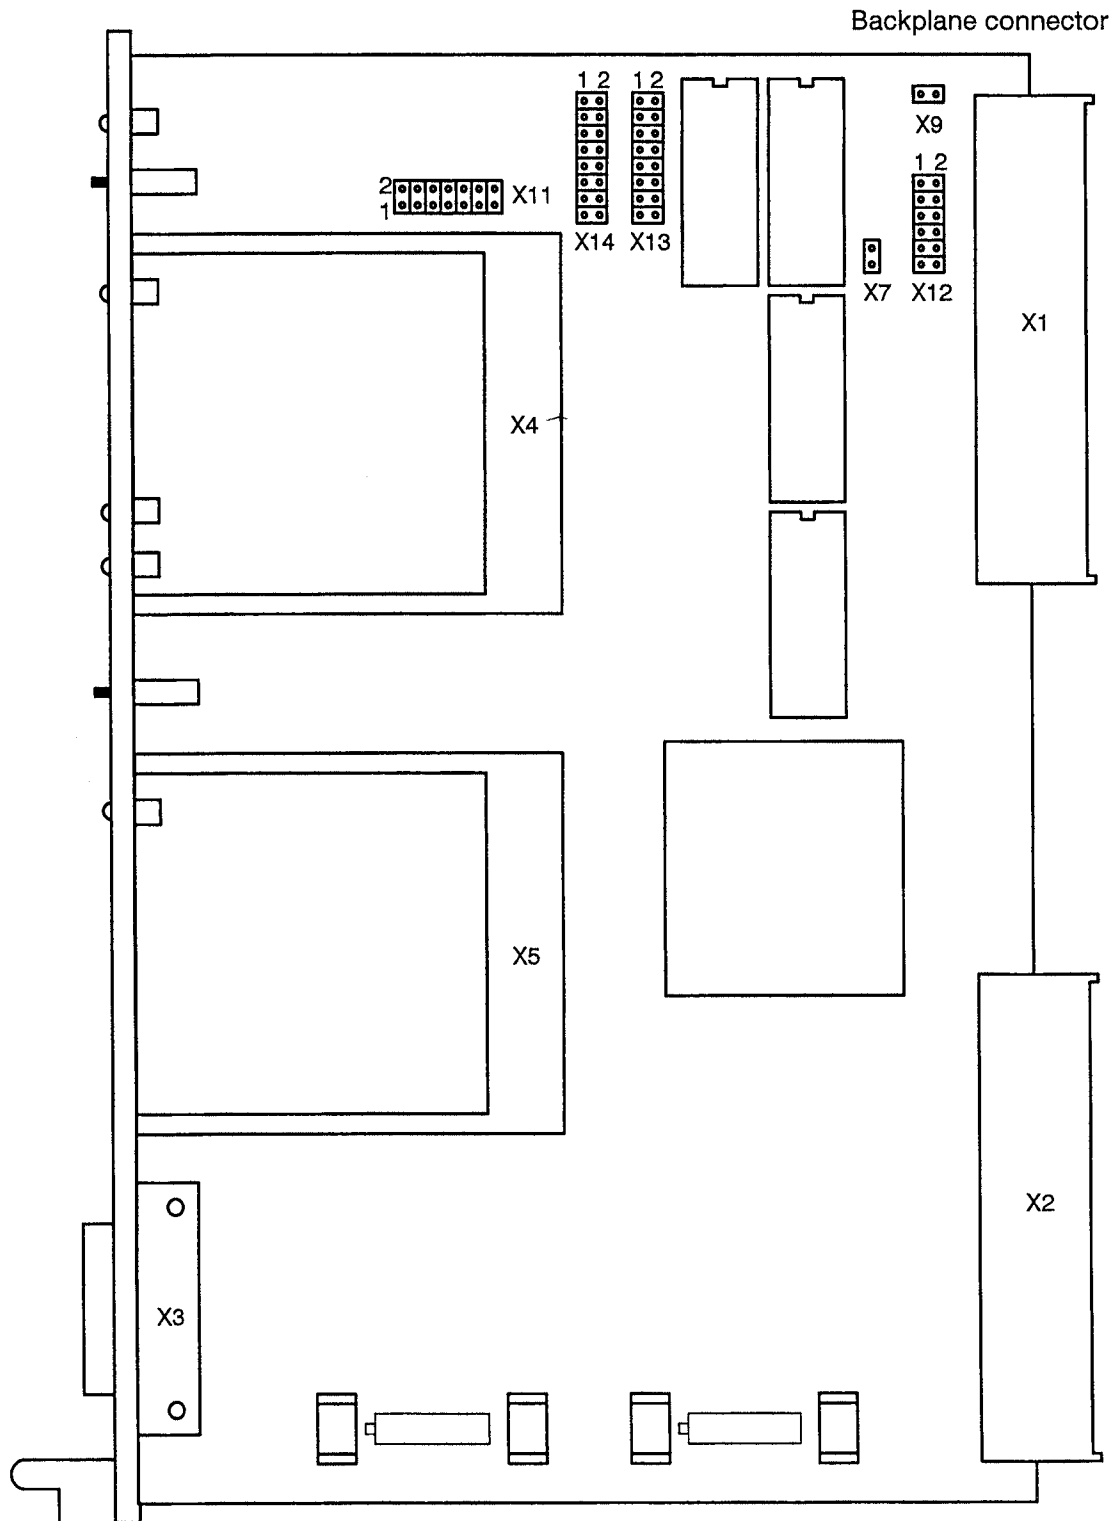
PCB of the CP 516; positions of the jumper modules
